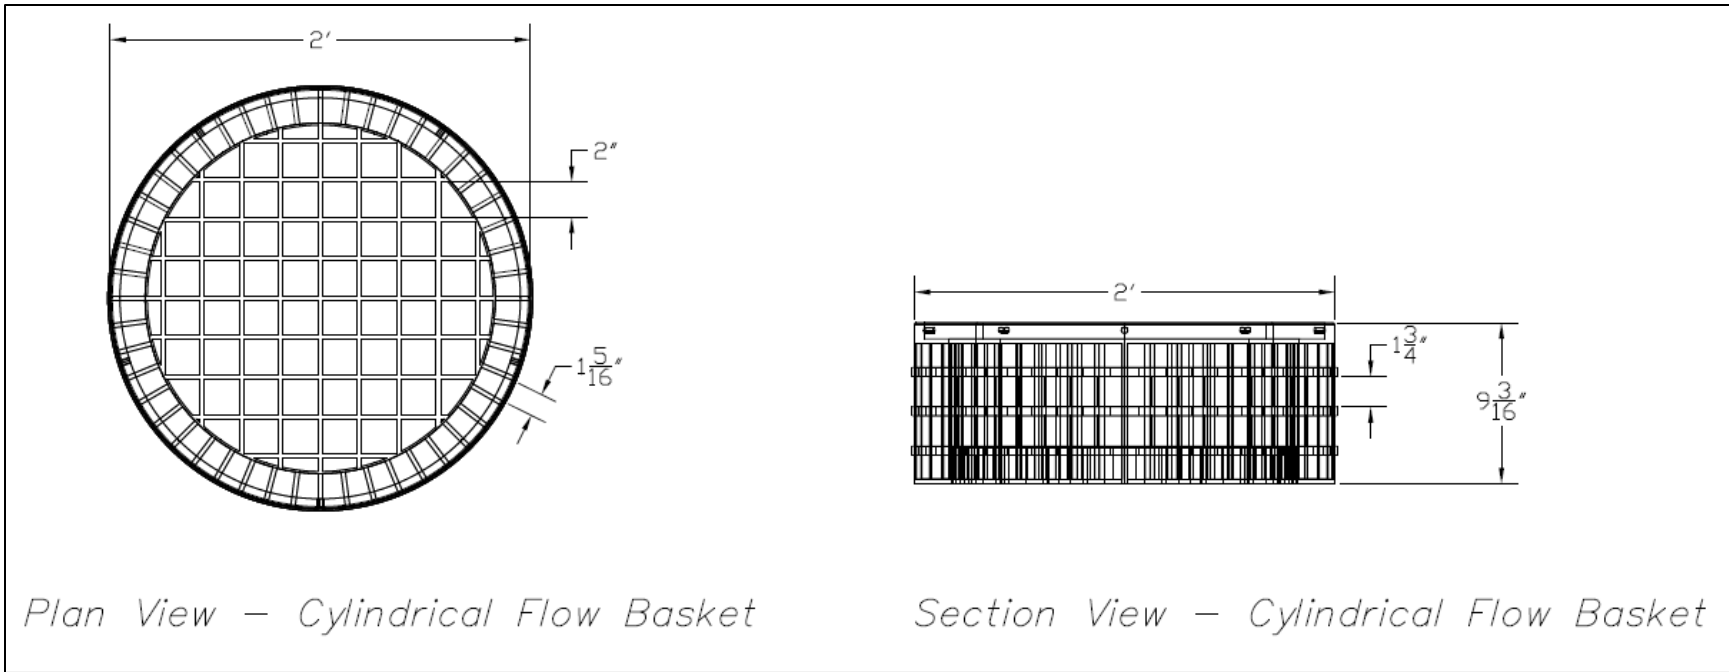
Dimensions at the prototype scale of the pump mounted cylindrical flow basket configuration testing in the physical model.
